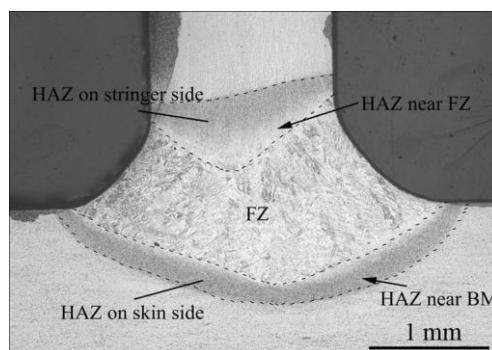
Cross-sectional macrograph of welded T-joint
